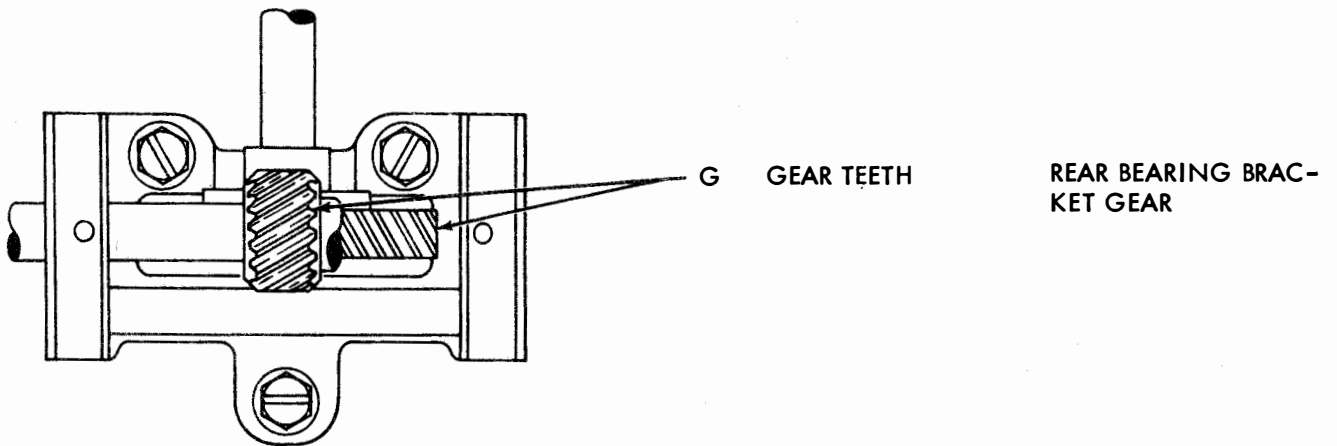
Rear Bearing Bracket Gear Mechanism
